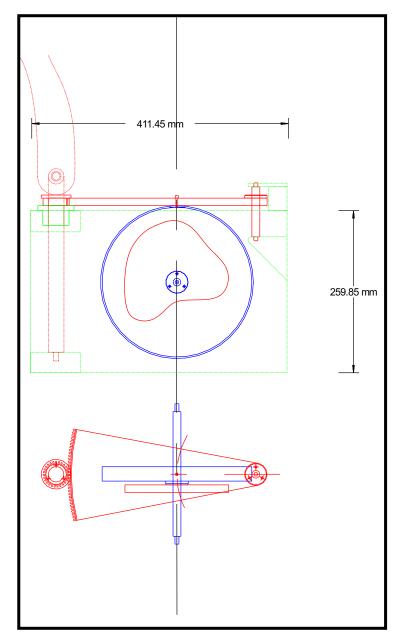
Swan Test Bed CAD, Front elevation and plan view. Drawn to scale but not reproduced here to scale.
